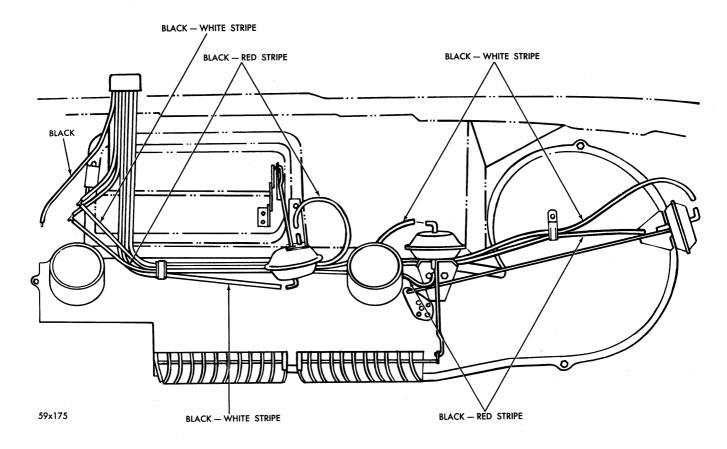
Vacuum Hose Alignment (Passenger Compartment)
